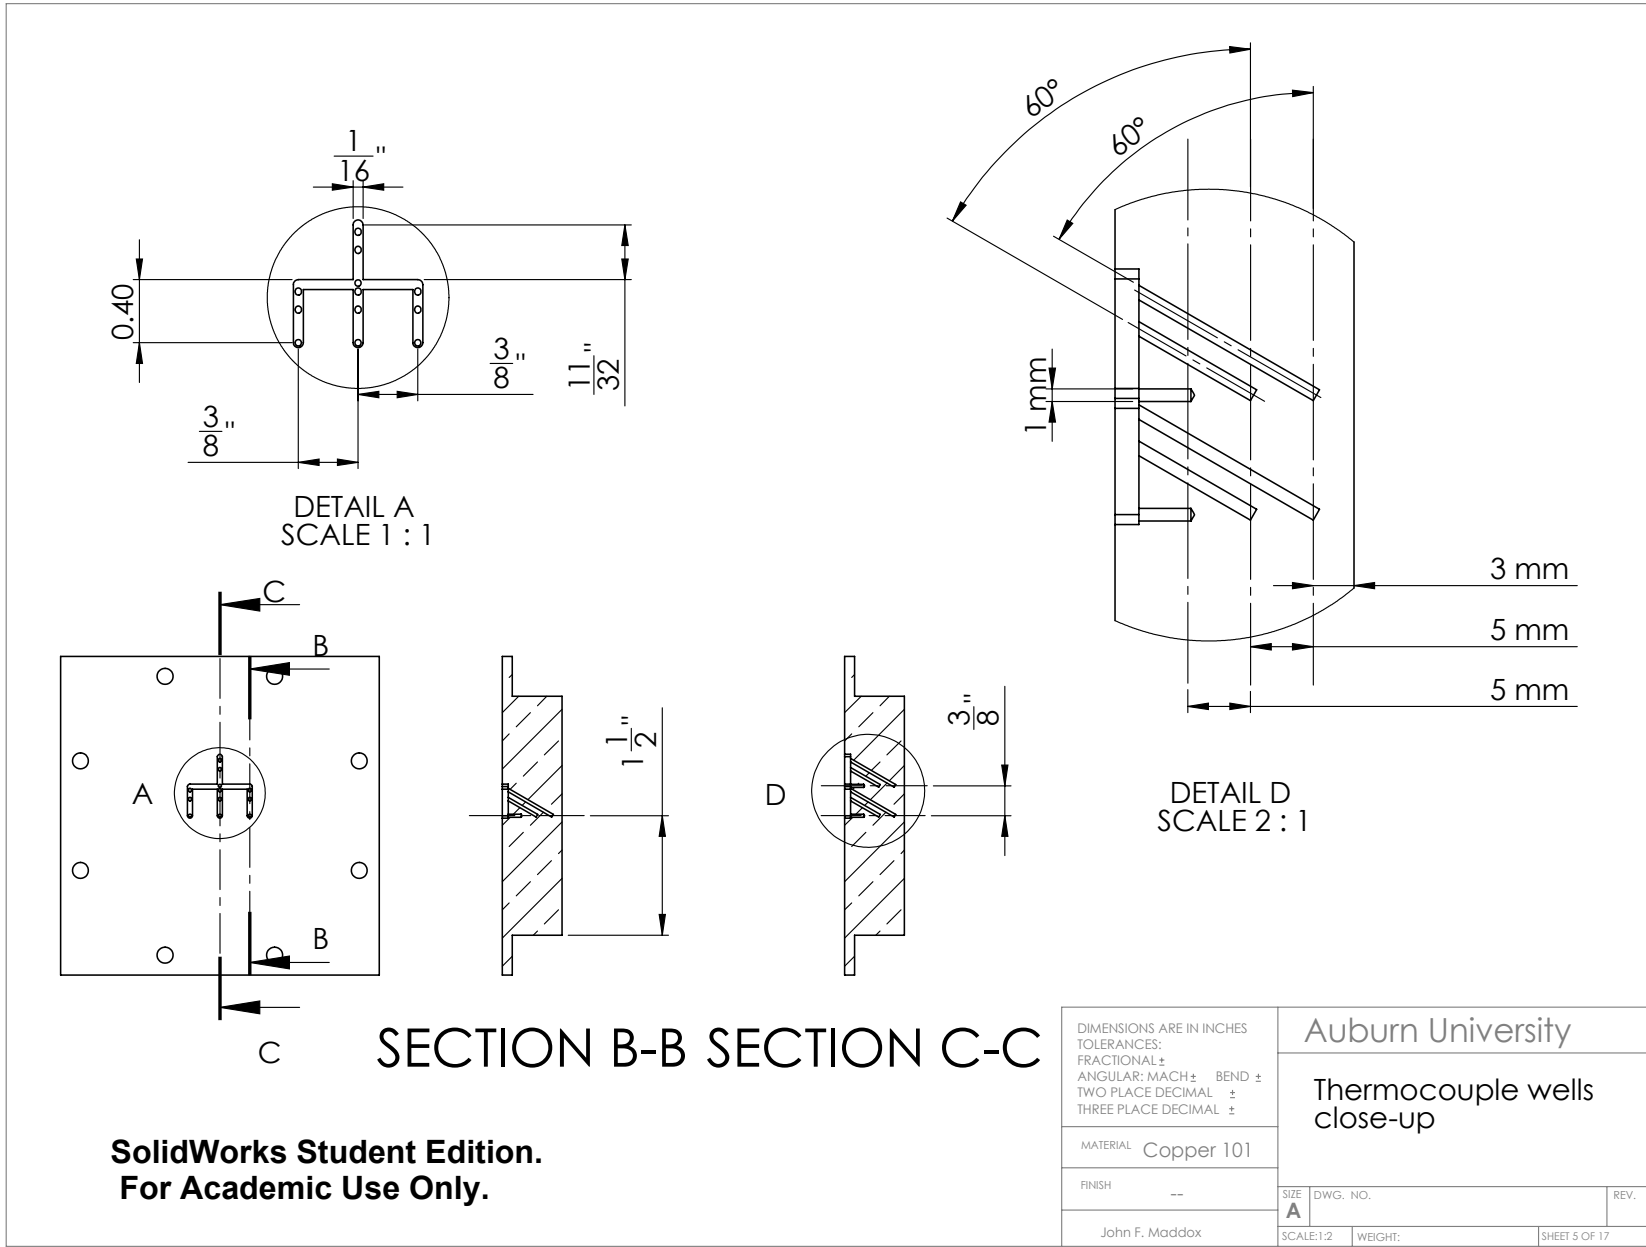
Detailed view of thermocouple wells in copper measurement block
